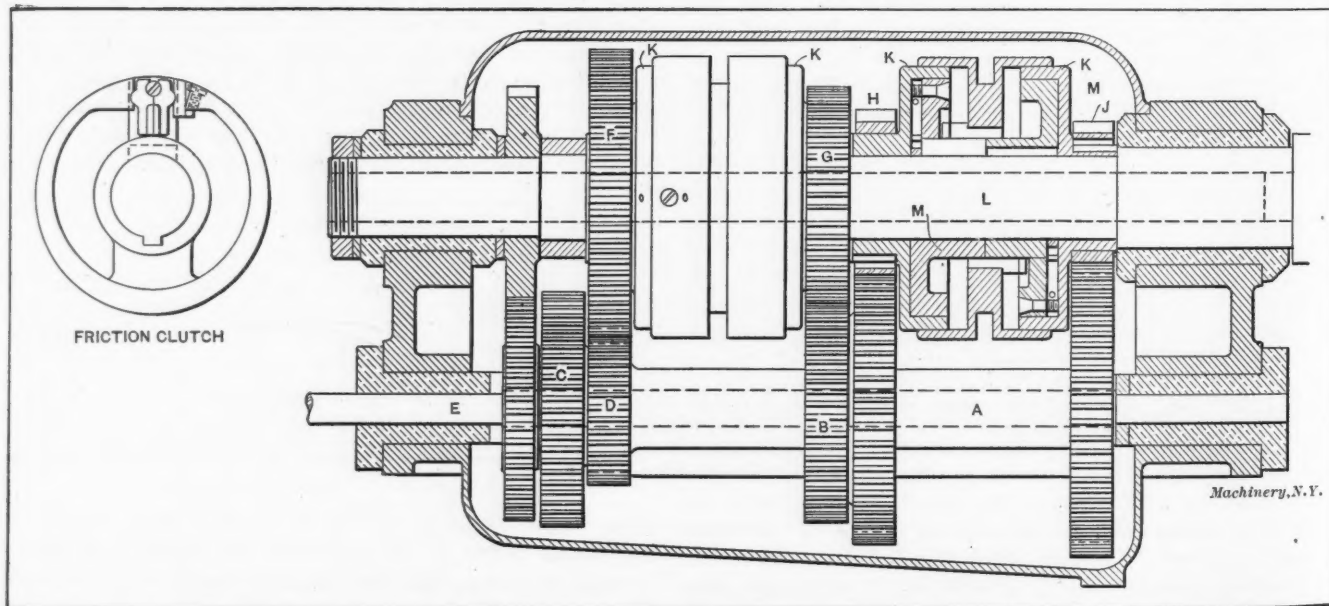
Sectional view of Fay & Scott Geared Headstock, and Cross-section of Clutch
